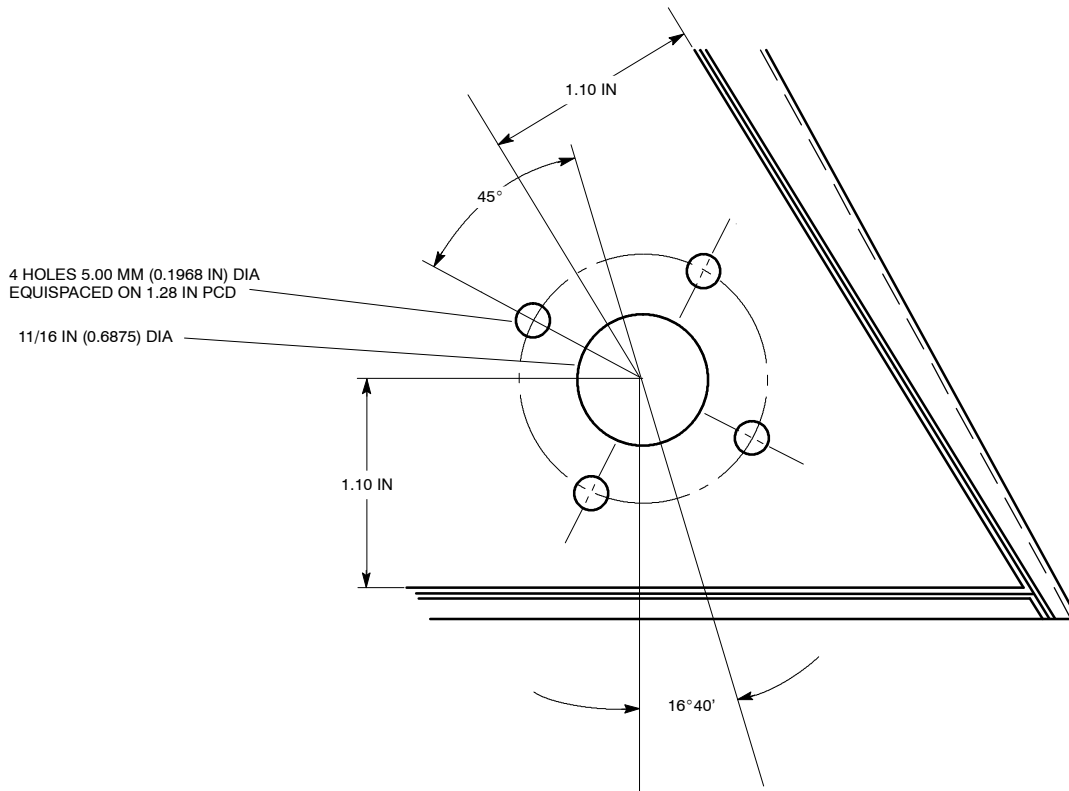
Detail of Rework to LH Bottom Plate of Oil Tank
